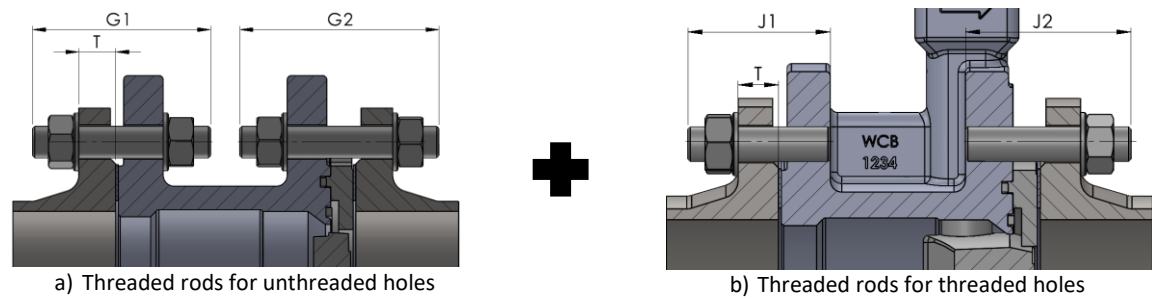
Dimensions of fasteners for valves with DF (Double Flange) type bodies
